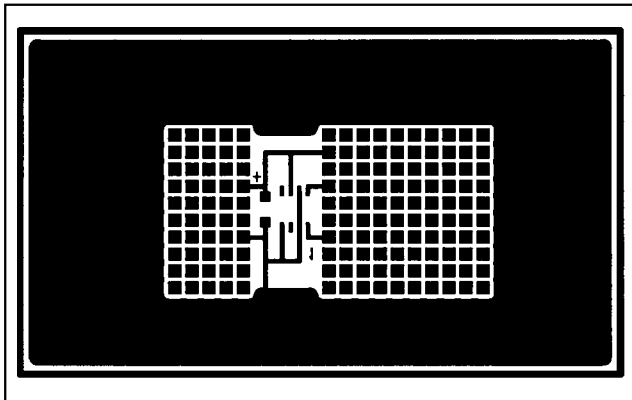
MAX845 EV Kit PC Board Layout—Solder Side
